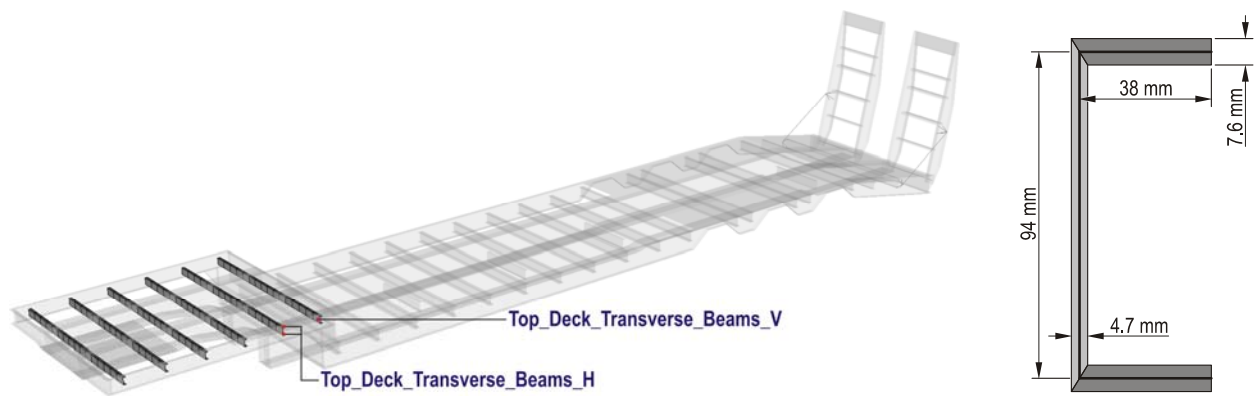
FE model of the top deck transverse beams and their cross-section
